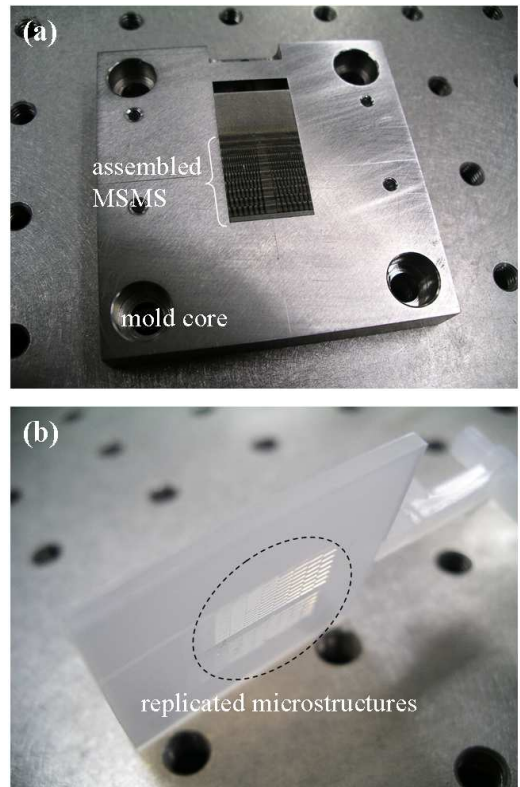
Photographs of (a) several MSMS modules assembled in the mold core system, (b) microinjection-molded article including a microstructured surface
